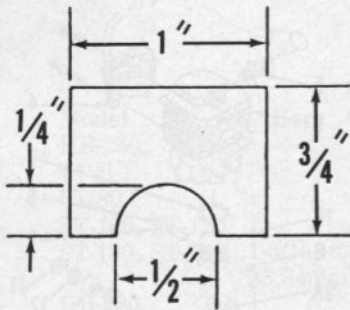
Shims used in crankshaft assembly may be made by cutting 0.0125 inch thick plastic, metal or other suitable material in the outline shown above. Refer to Fig. HL40-7 and text.
